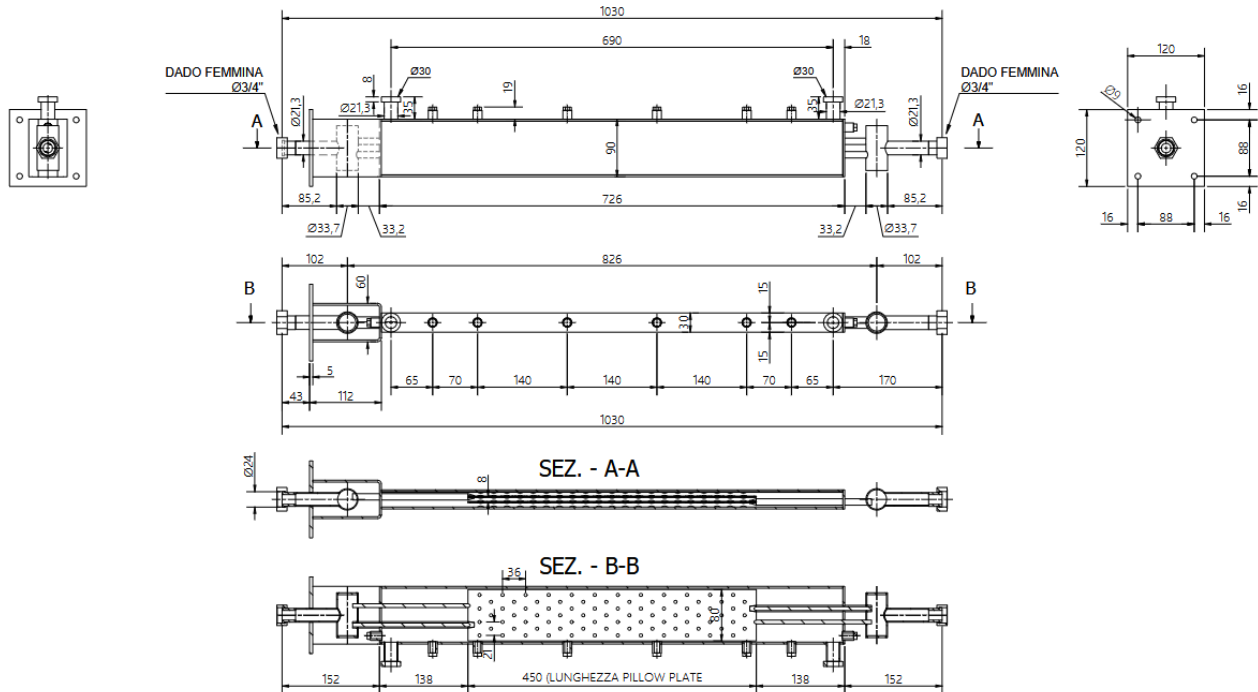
Technical drawing to manufacture the Small Scale PPHE prototype – version 1.
